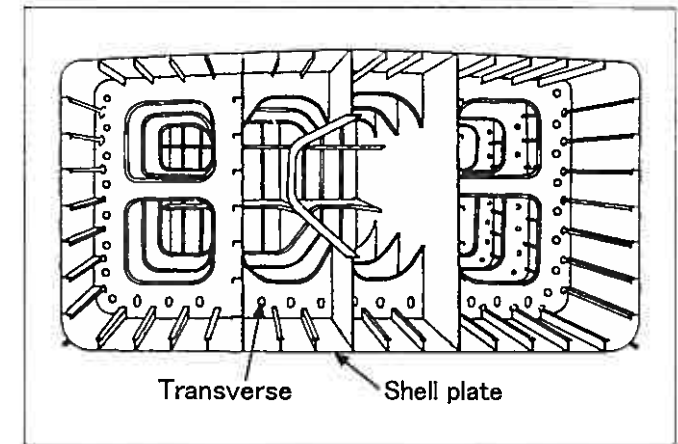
Shell-plate-to-transverse fillet welding is a typical application of DW-200 in shipbuilding
